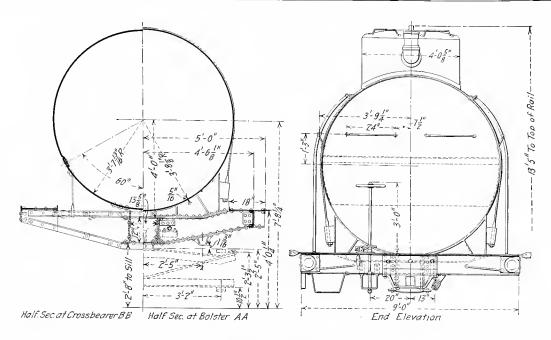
Cross Section and End Elevation of Canadian Pacific Steel Frame Tank Car Shown in Figs. 82 and 349.
